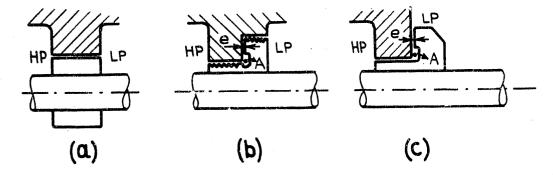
Type of balancing devices for boiler feed pumps: (a) drum; (b) and (c) disk.
